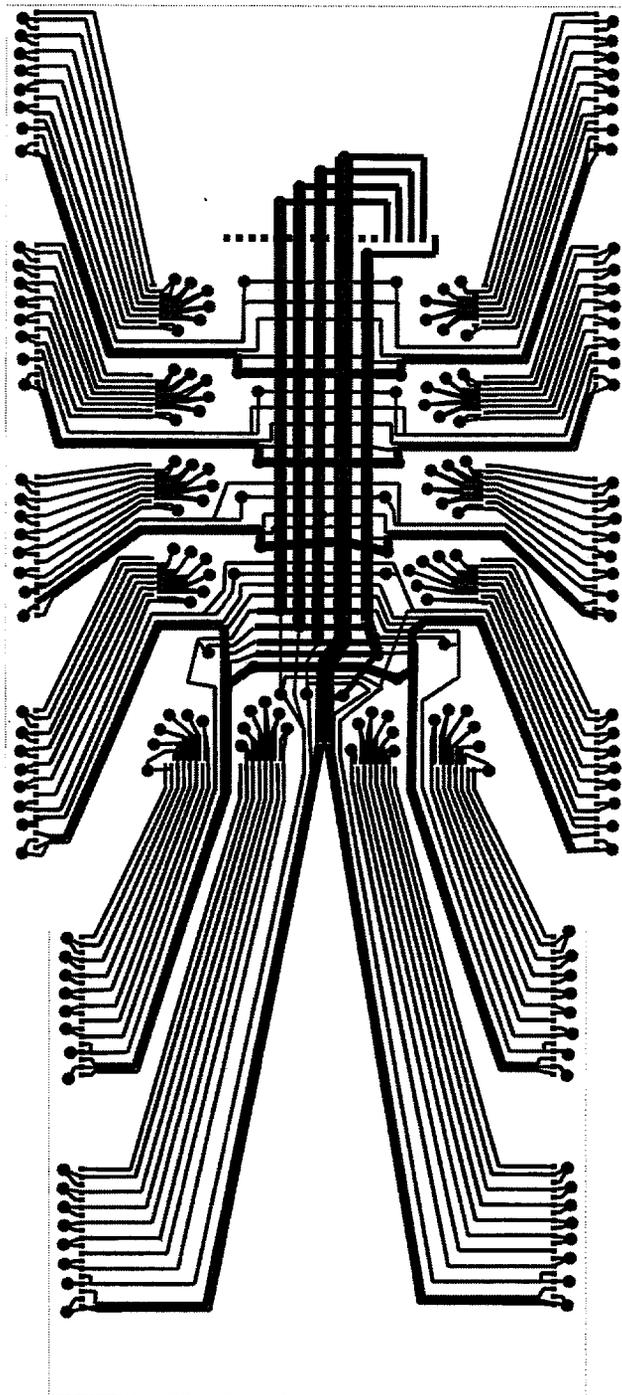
Layout of the two metal layer Flex Hybrid using standard design rules.
